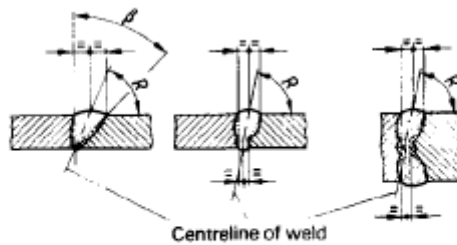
Examples of rotation ( $R = 90^\circ$ ) of symmetrical butt welds with horizontal workpiece surface
